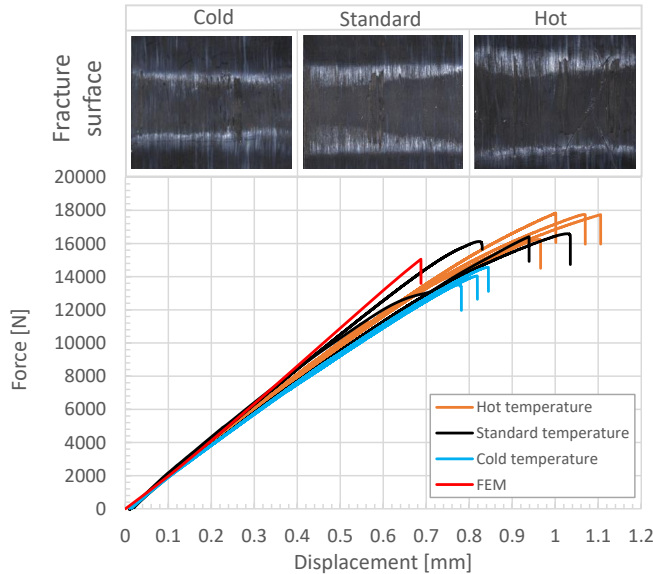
SLS tensile load-displacement curves: Weld size based on fracture surface for three weld temperatures.
